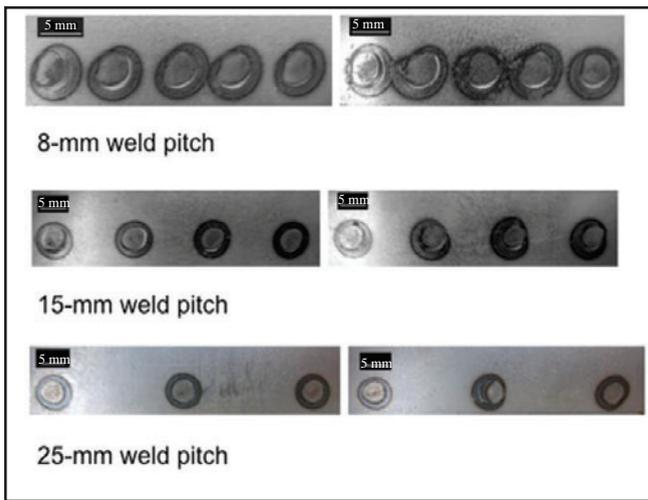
Welded coupons of 1.0-mm bare mild steel sheets, without (left) and with (right) the plastic insert of 8-, 15-, and 25-mm weld spacing.
